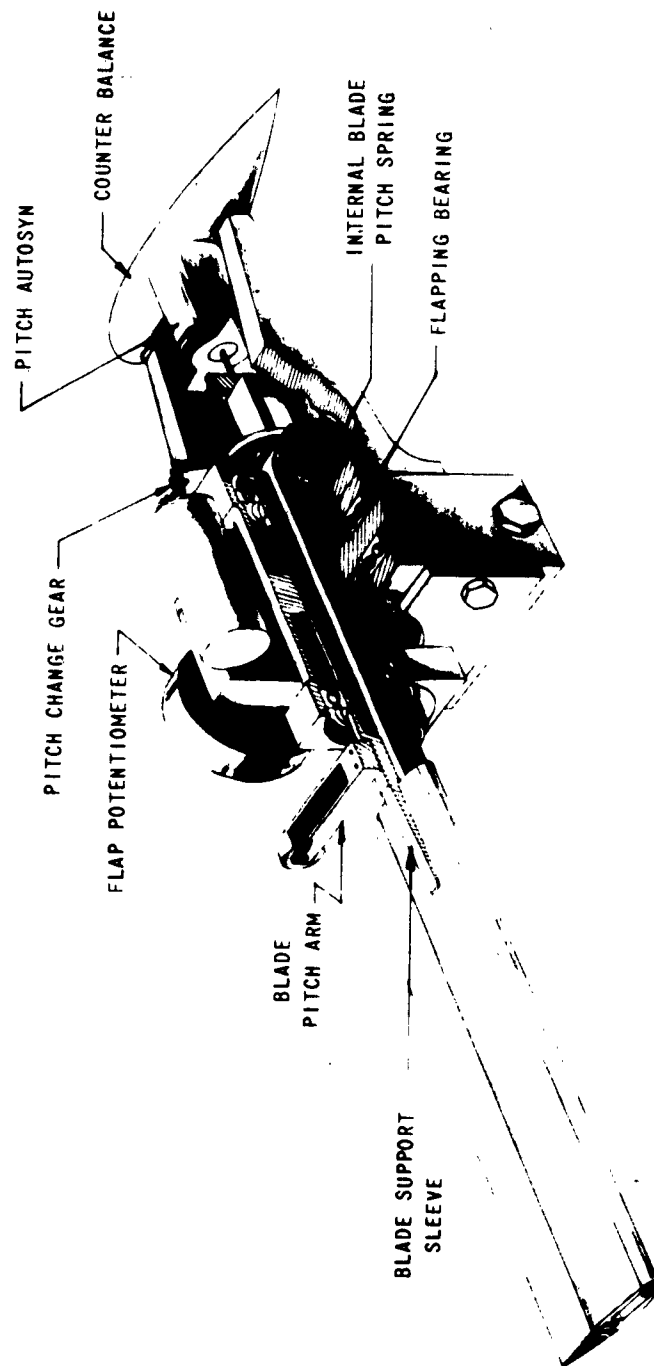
HEAD - HELICOPTER FLUTTER MODEL
